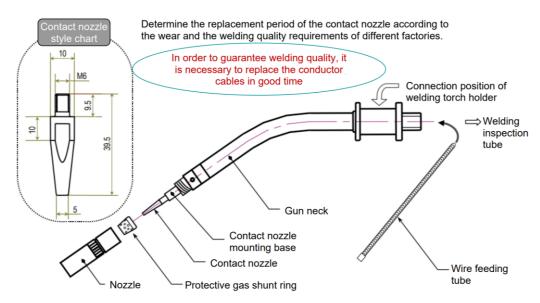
Introduction and precautions of components of welding torch
